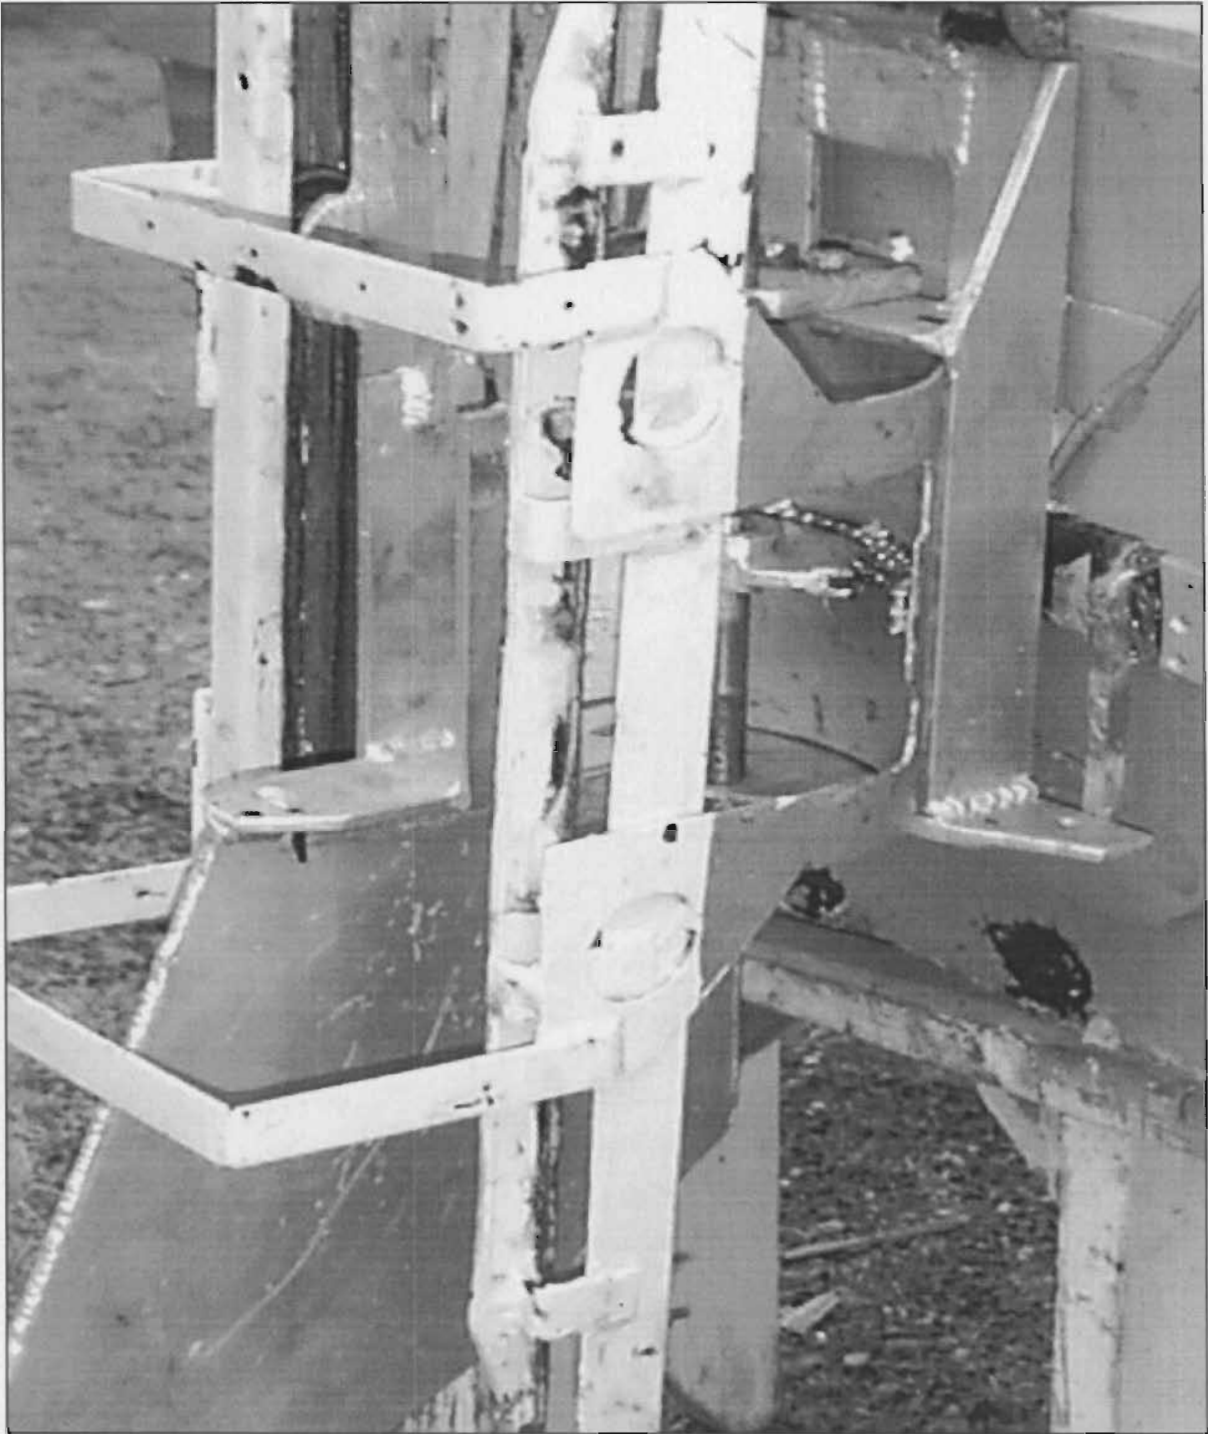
23 Slider assembly with rudder like enclosure for the linkage rod pitch-actuator
